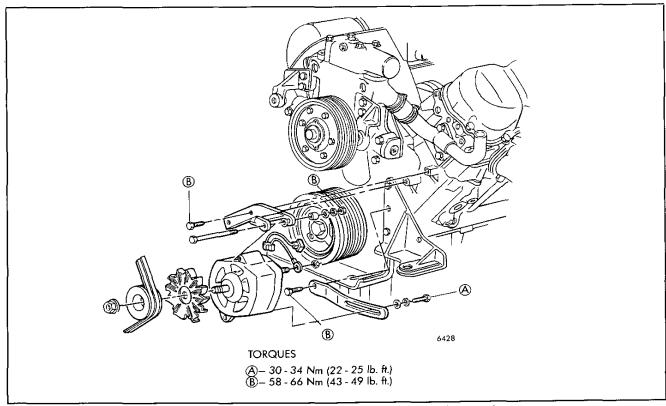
Relative Location of Parts (8.2L Marine Alternator)
